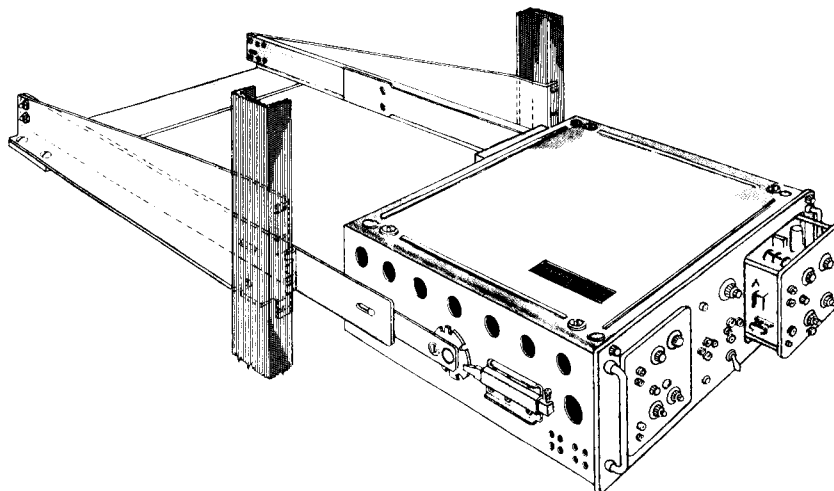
The completed installation. It may be necessary to loosen the bolts and allow the slide mechanism to adjust to the weight of the instrument.
